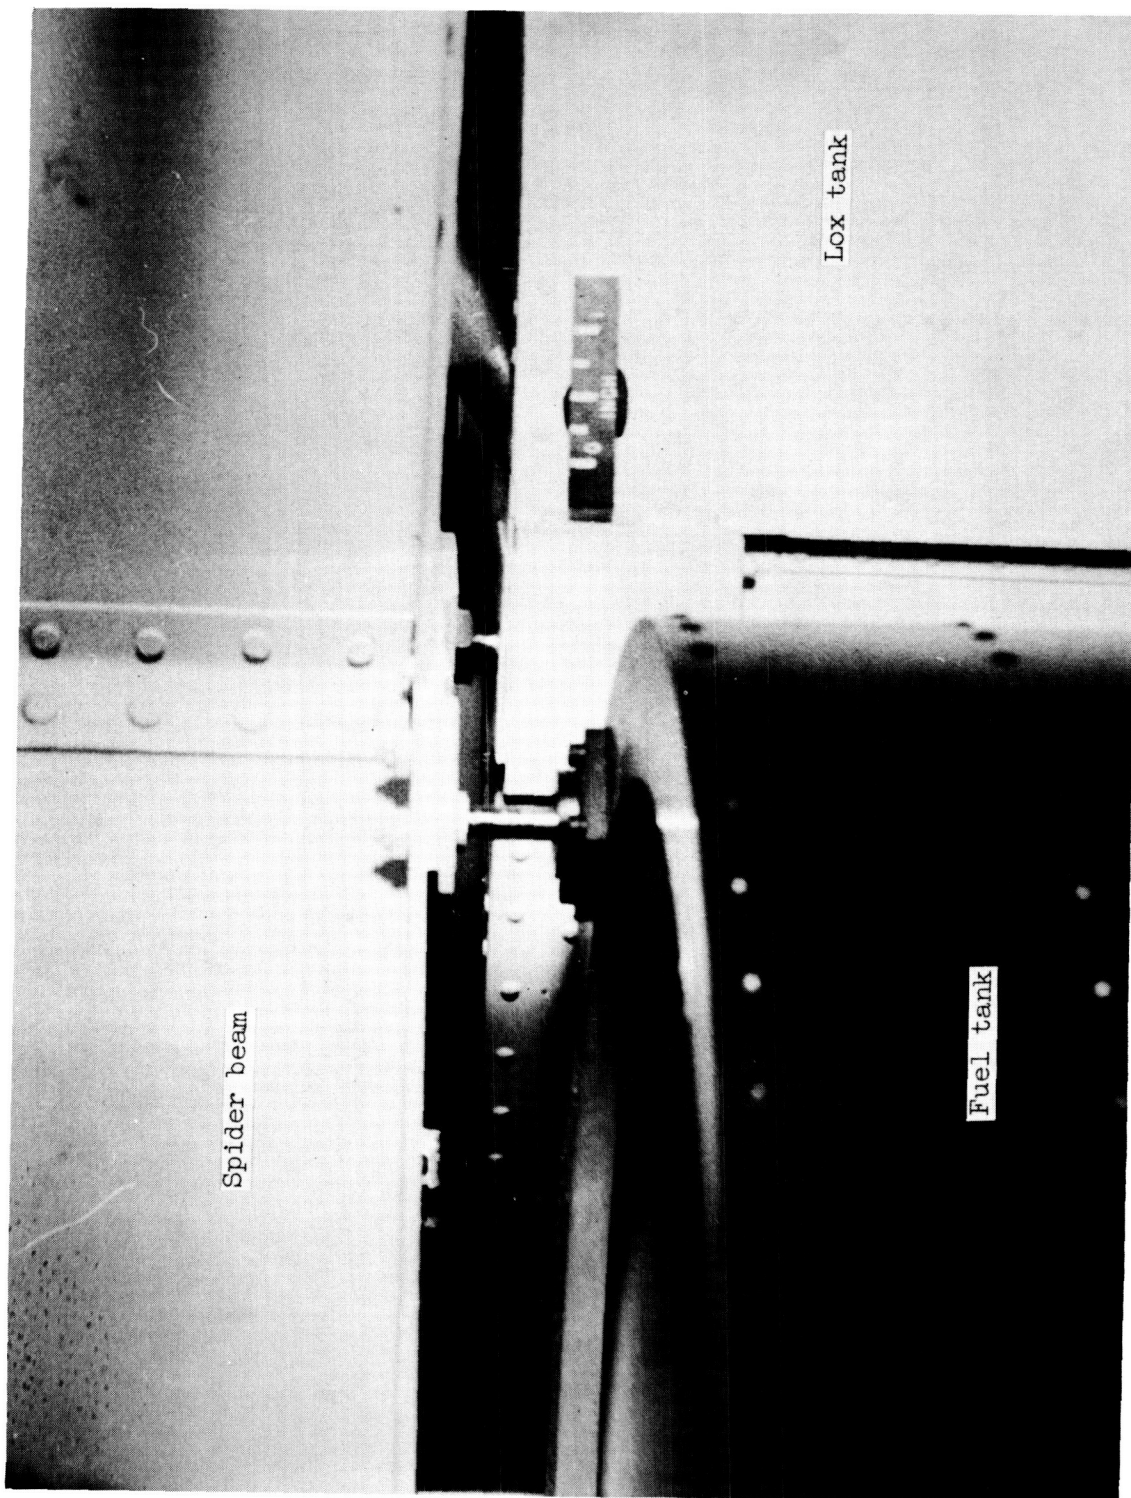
Outer-tank upper attachment joints. L-61-3336.1
